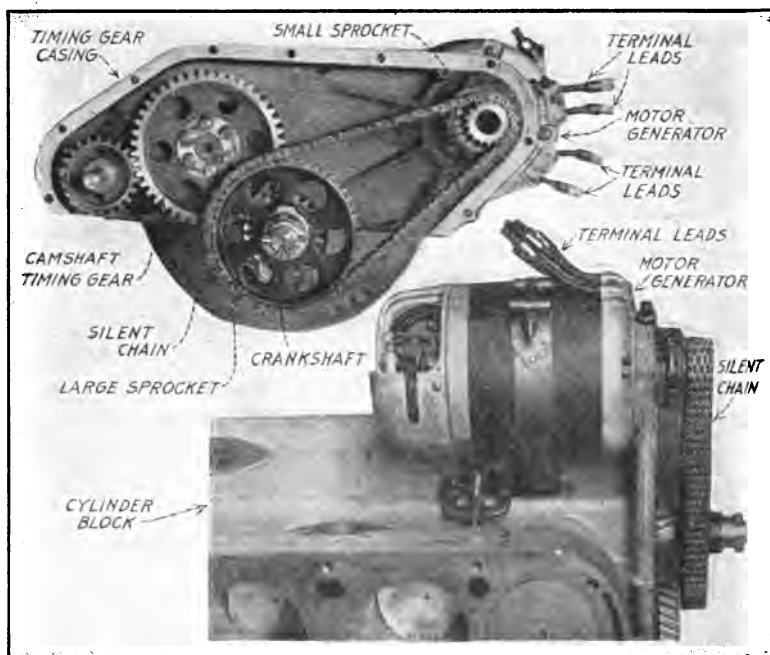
Method of Driving Dodge-North East Motor Generator by Silent Chain Connection with Engine Crankshaft.
